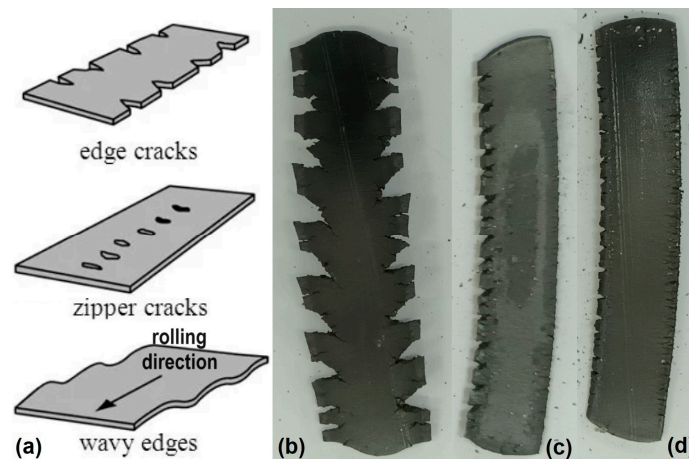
Rolling cracks: (a) three types of schematic cracks [41]; (b) bilateral edge cracks on an overheated Fe–Mn–Si specimen; (c) uneven edge cracks on a curved hot-rolled Fe–Mn–Si–Cr–Ni specimen; (d) common edge cracks on a hot-rolled Fe–Mn–Si–Cr–Ni specimen.
